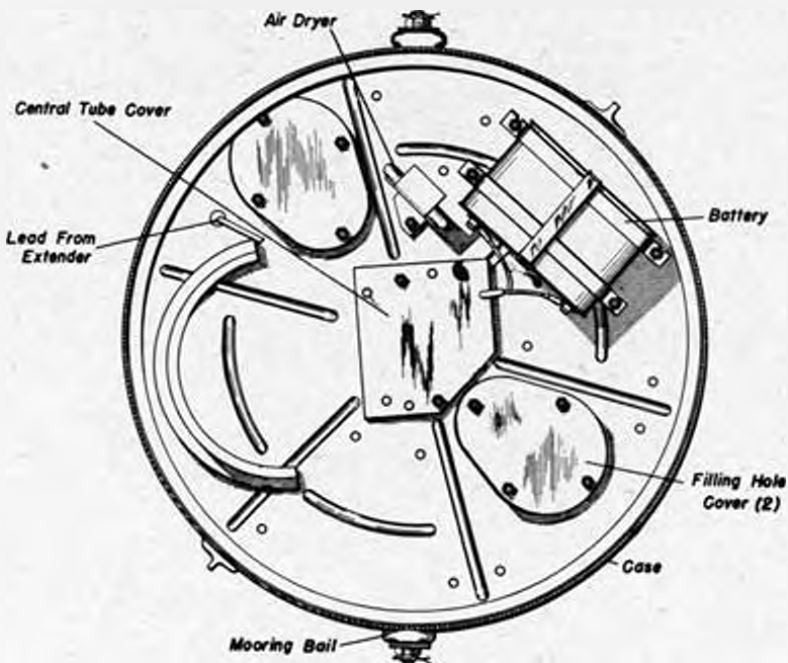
Mk 16-1 Mine, Top View - Cover Plate Removed
